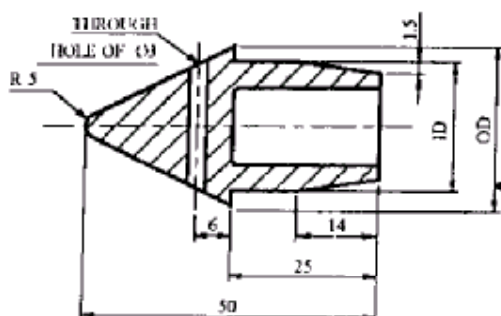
TYPICAL DRAWING OF CAP FOR TUBE END
